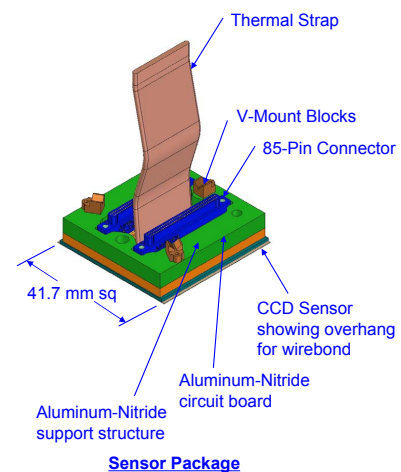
The sensor package with details of the connections and mounting fixtures
